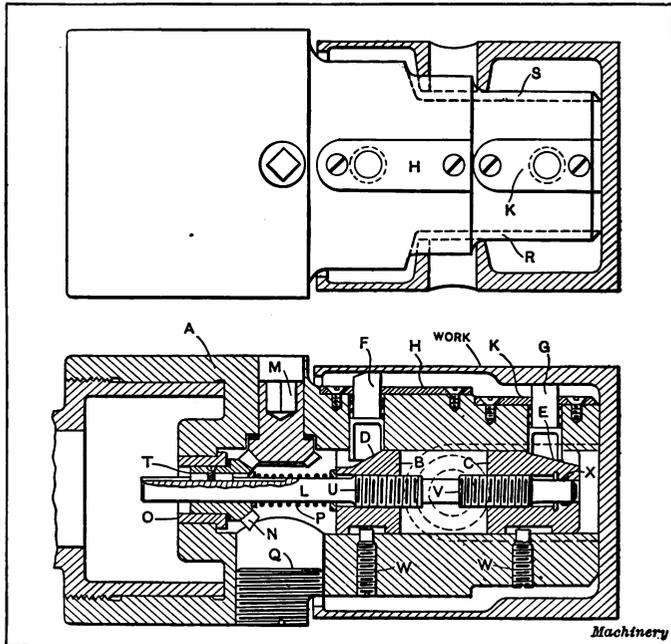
Special Chuck for holding Gas Engine Pistons internally
